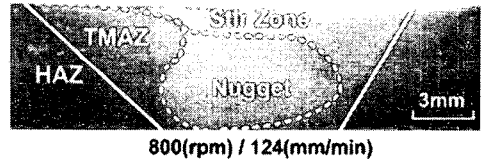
Macro-structure of cross-section welded by full screw type tool at the condition of 800rpm and 124mm/min speed
